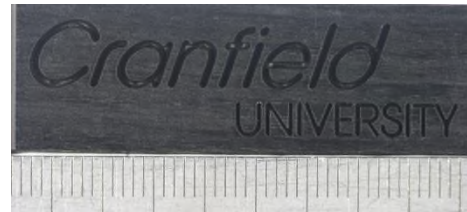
Pulsed laser machining of carbon fibre reinforced composite
